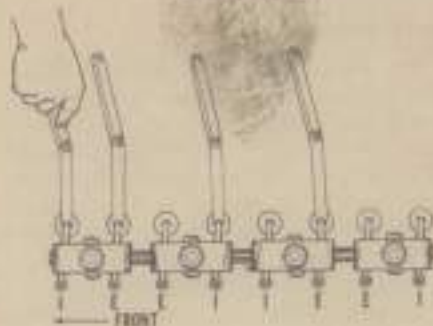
D-15 diesel. With number 1 piston at TDC on compression stroke, valve clearances (tappet gap) can be set on the four valves indicated. Clearance for inlet valves (I) should be 0.010 inch hot; 0.019 inch hot for exhaust valves (E). Refer to Fig. 33A and adjust remainder of valves.
